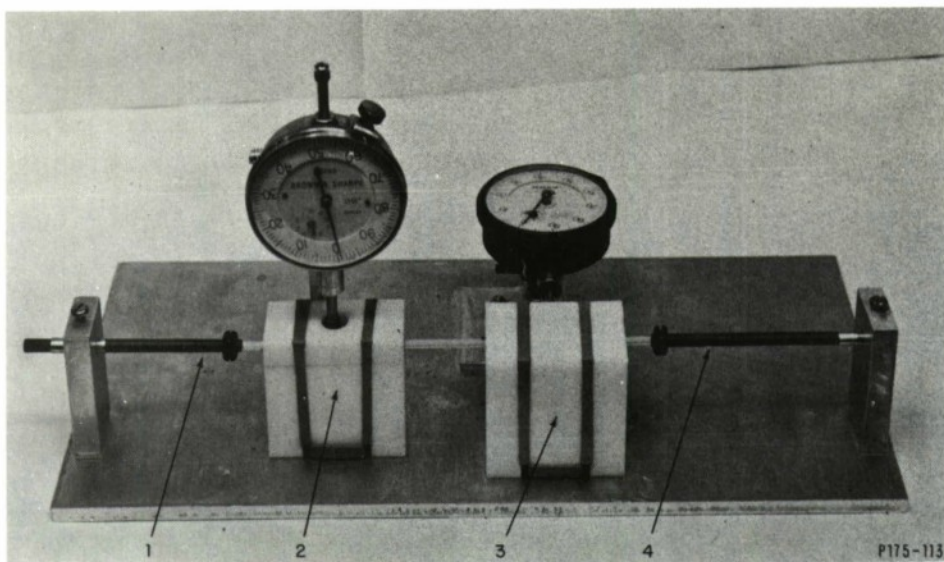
Test jig used to measure cross-sectional dimensions of bifurcated tubing.
